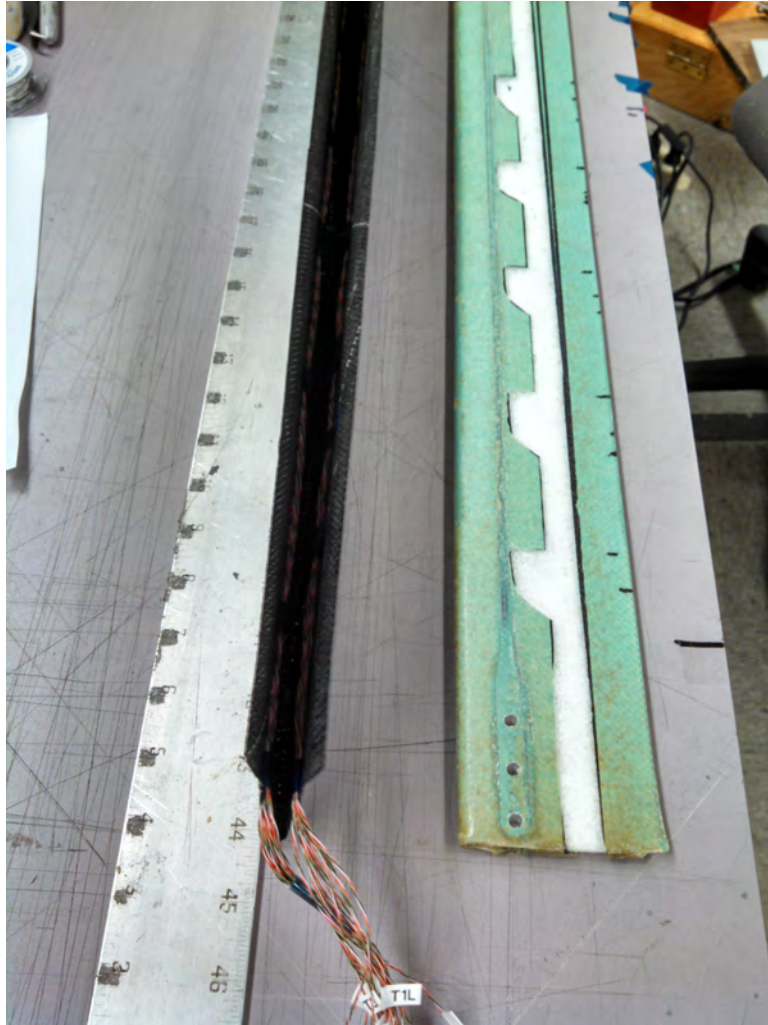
Cured carbon skin with strain gages bonded to the inner surface of the skin and wired (left), and blade core with channels removed for wiring and the strain gages (right).
